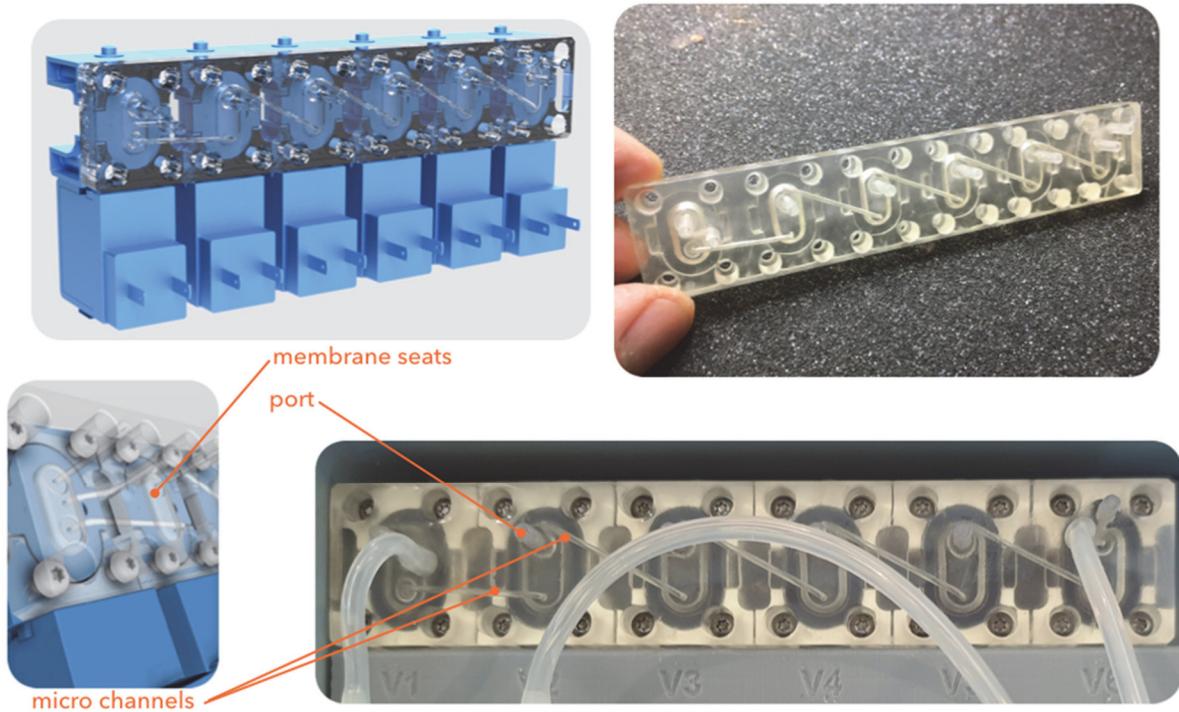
Fluidic block. Top left: CAD model rendering; top right: the block right after printing (supports removed); bottom: channels and valve seat detail. The fluidic channels connecting valve chambers and the inlet/outlet nipples for tubing interconnection are visible.
